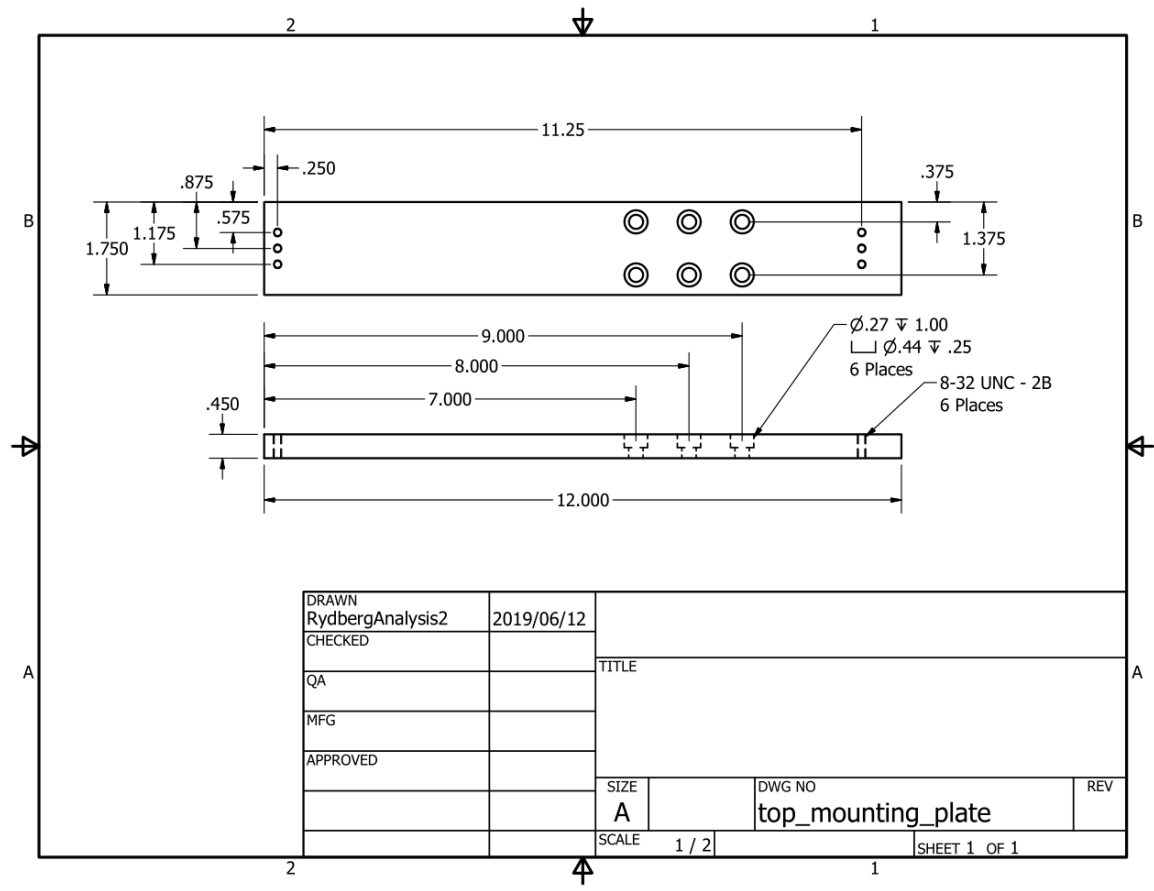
Mechanical drawing of the top mounting plate for the second sheet trap assembly.
